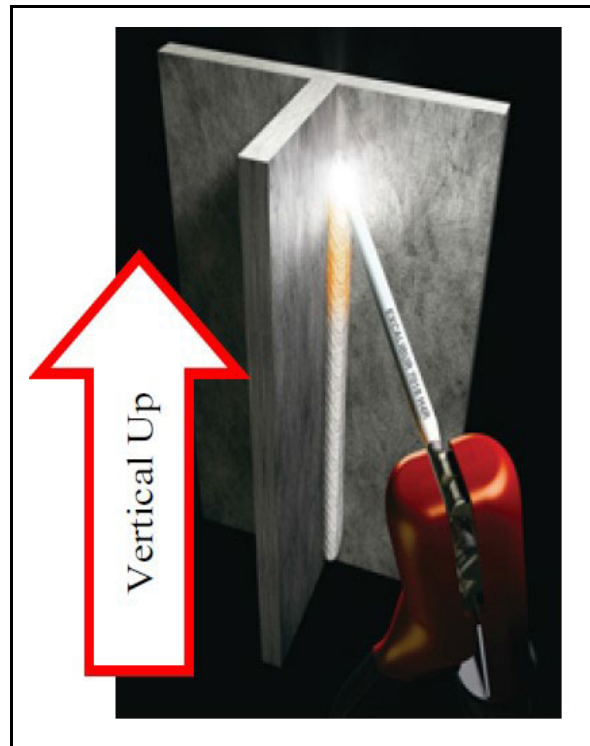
Figure A - Joint preparation and welding guide (source AWS D14.3:1010, Figure A.1)
